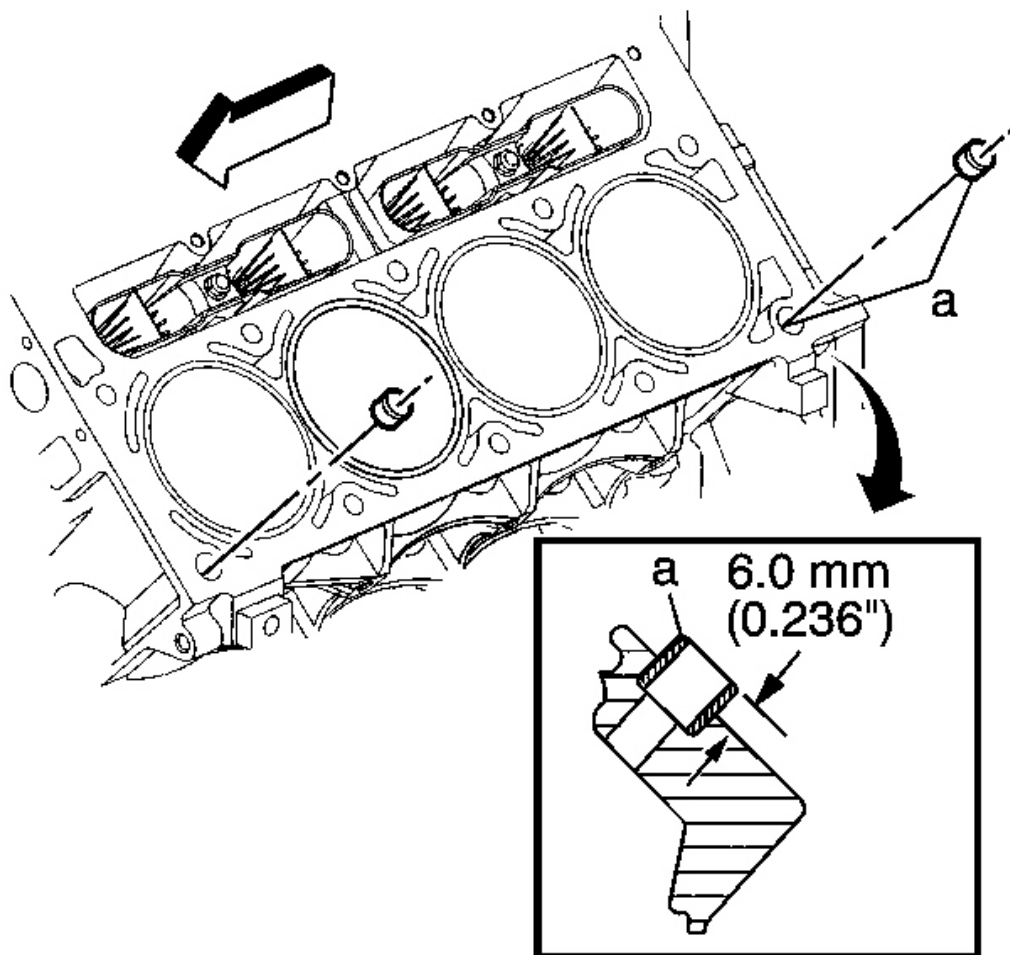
Identifying Cylinder Head Locating Pins Installation Position
